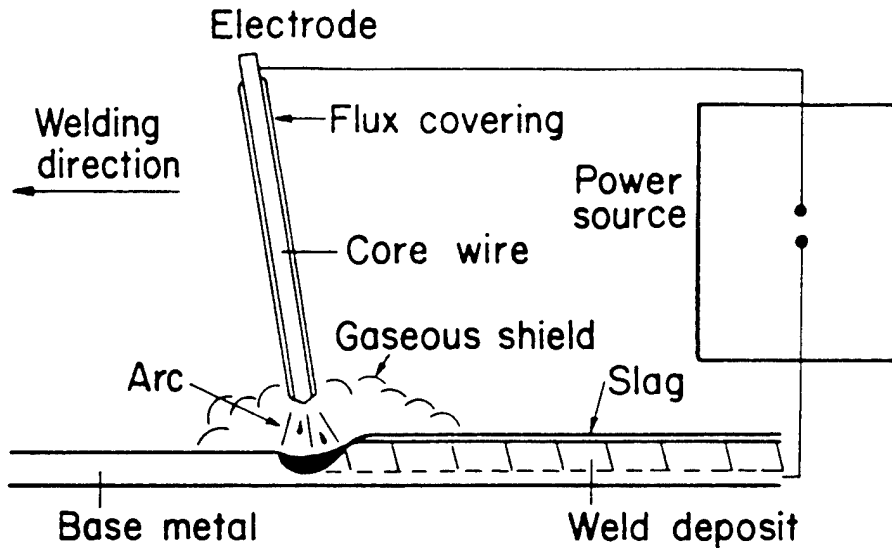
SMA welding process [From Ref. 2]
